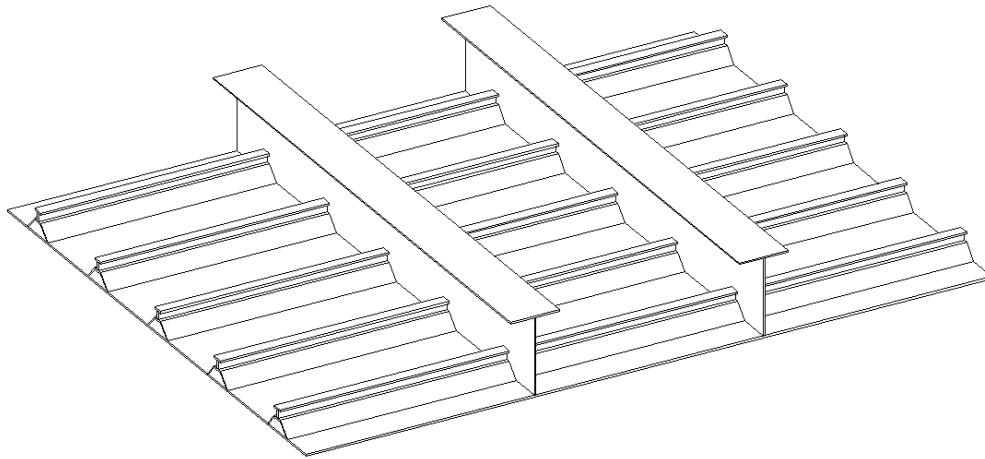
The panel that is assessed here has conventional deep frames in the transverse direction and alternative longitudinal stiffeners.
